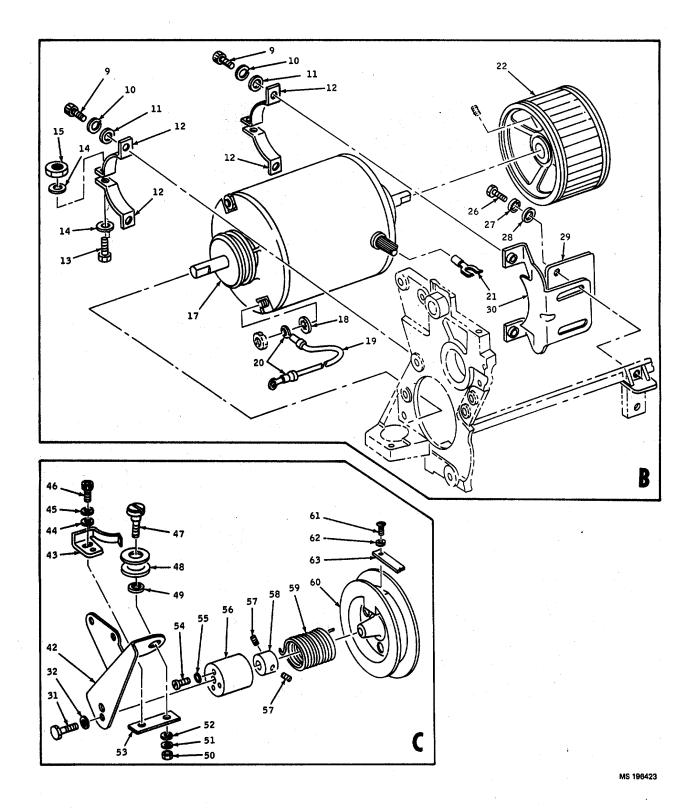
Power Distribution Mechanism, Exploded View (Sheet 3 of 3)
